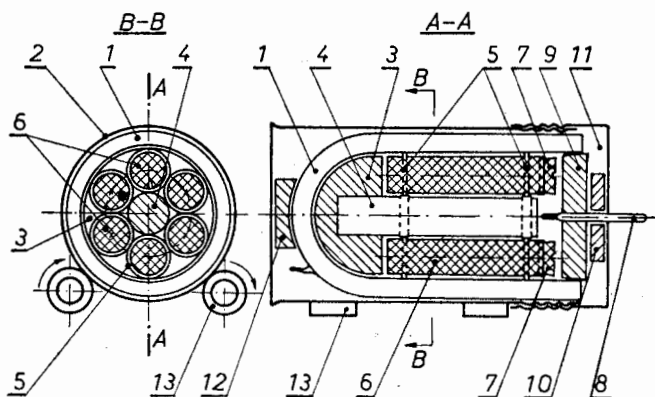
Crystallizer; 1 — Dewar vessel, 2 — housing, 3 — rubber packing, 4 — steel bolt, 5 — cage holder, 6 — wire cages, 7, 9 — rubber stoppers, 8 — thermometer, 10 — rubber compression ring, 11 — lid, 12 — rubber cushion, 13 — drive rolls.
